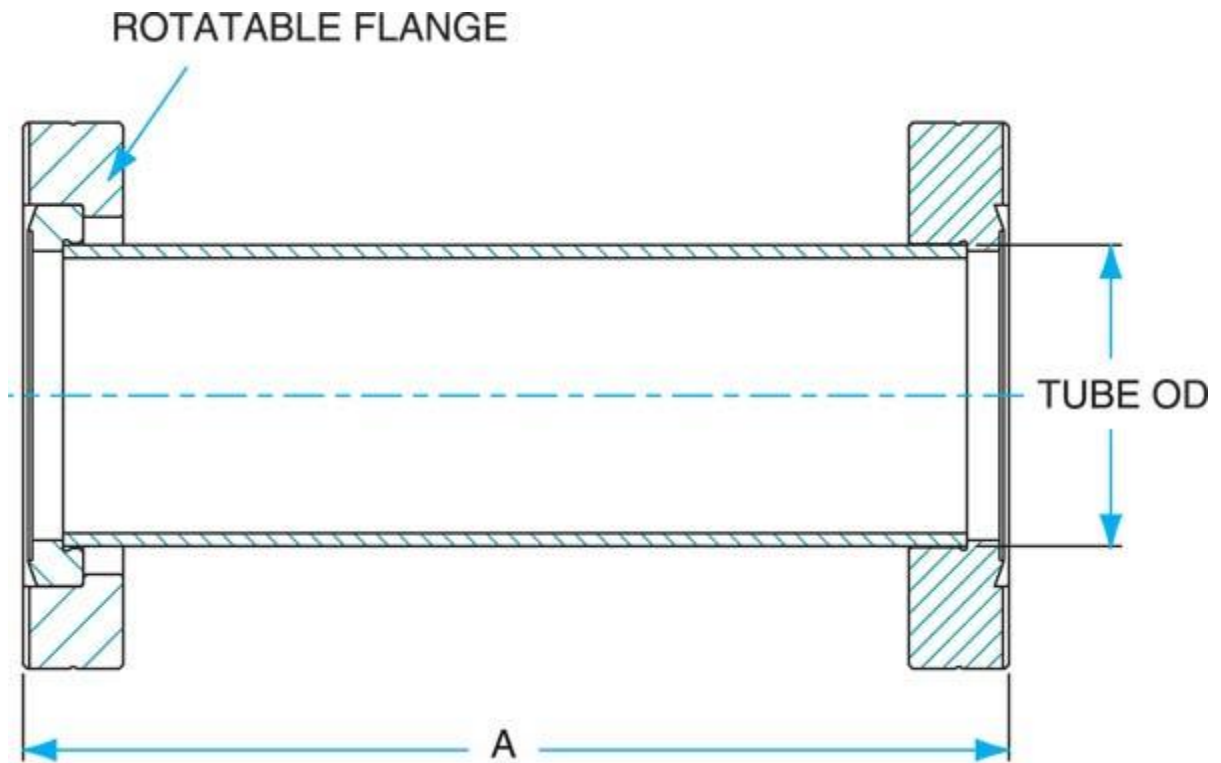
Schematic of Kurt Lesker Part# FN-0275 (A = 15.24 cm, Tube OD = 3.81 cm)
